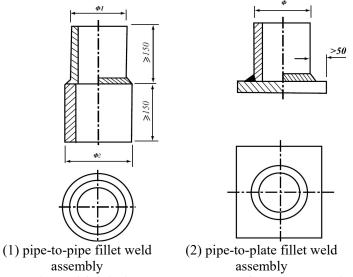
Fillet weld assembly of copper alloy pipe
